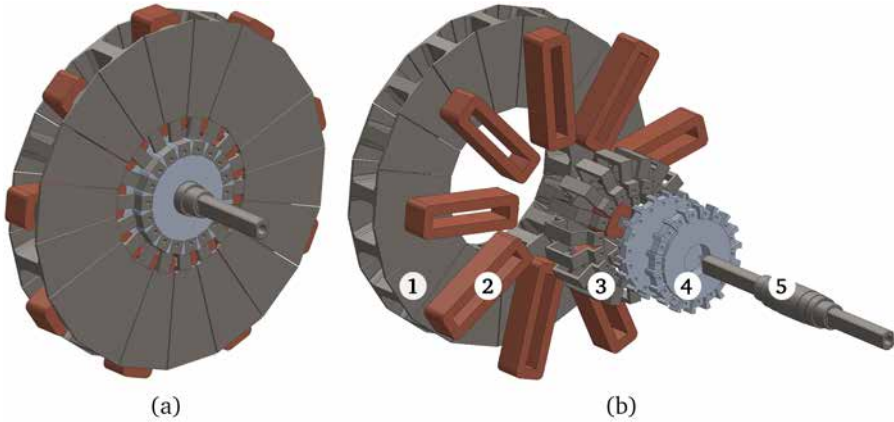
The stator assembly of SAT PMBLDC in-wheel motor. (a) Complete stator assembly. (b) Exploded view (1. Segmented stator tooth, 2. coils, 3. tooth holder, 4. spider, and 5. shaft).
